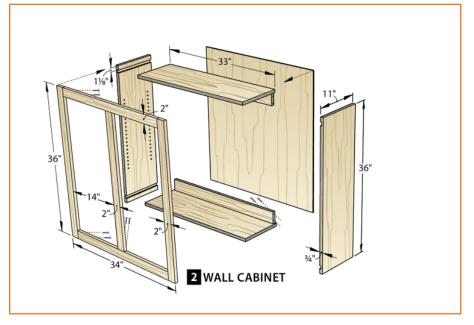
Reading and Confirming the Latest Layout Drawings (remove the label in the picture)
